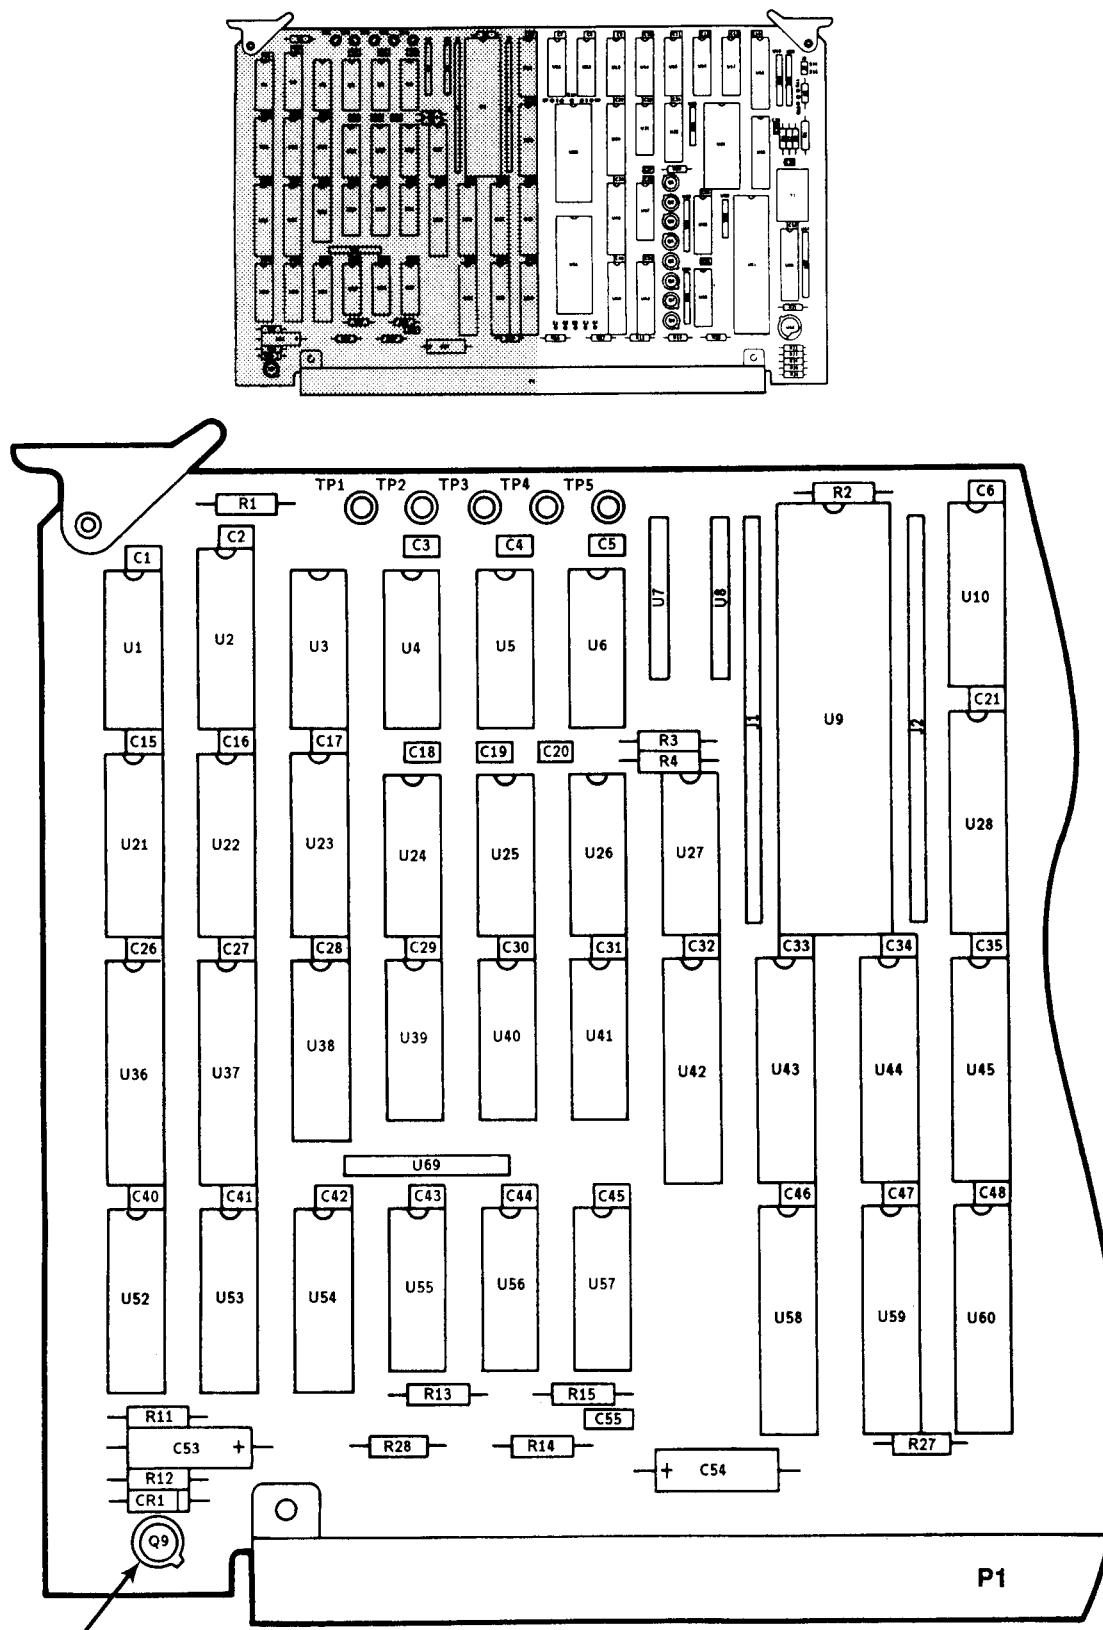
Circuit Card Assembly, Universal CPU (3A1A1) (Sheet 1 of 3).
